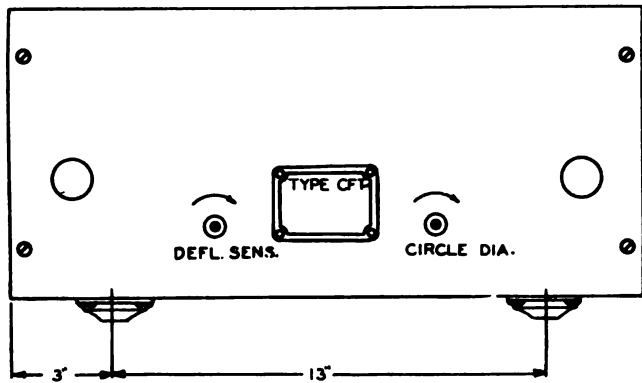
Outline drawing of Bearing Indicator ID-121/CRD-3.
